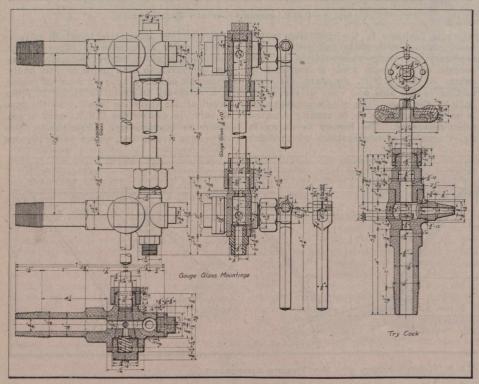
C.N.R. Standard Gauge Glass Mountings and Try Cock.
